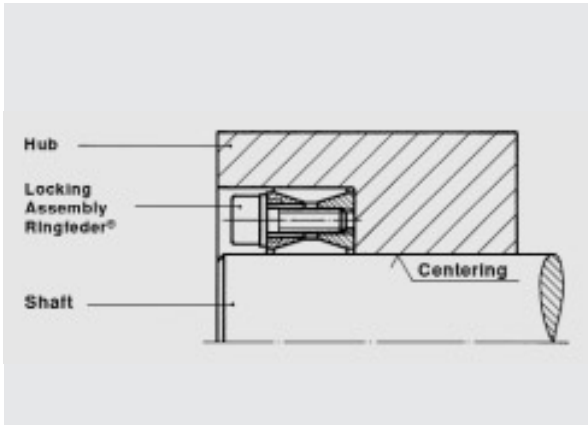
· Locking Assembly RINGFEDER®. Connection. Design, designations
